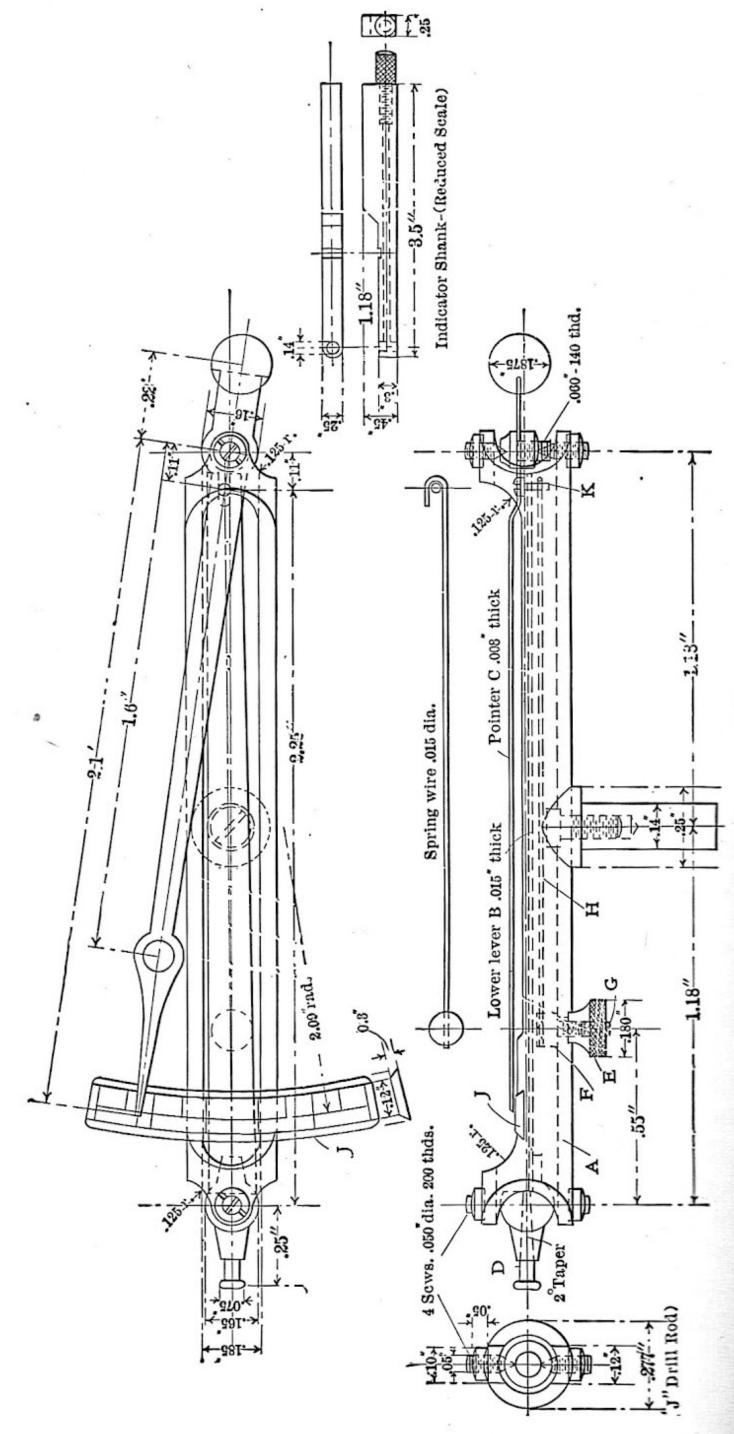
TEST INDICATOR (SHOWN ABOUT 11 TIMES ACTUAL SIZE)
